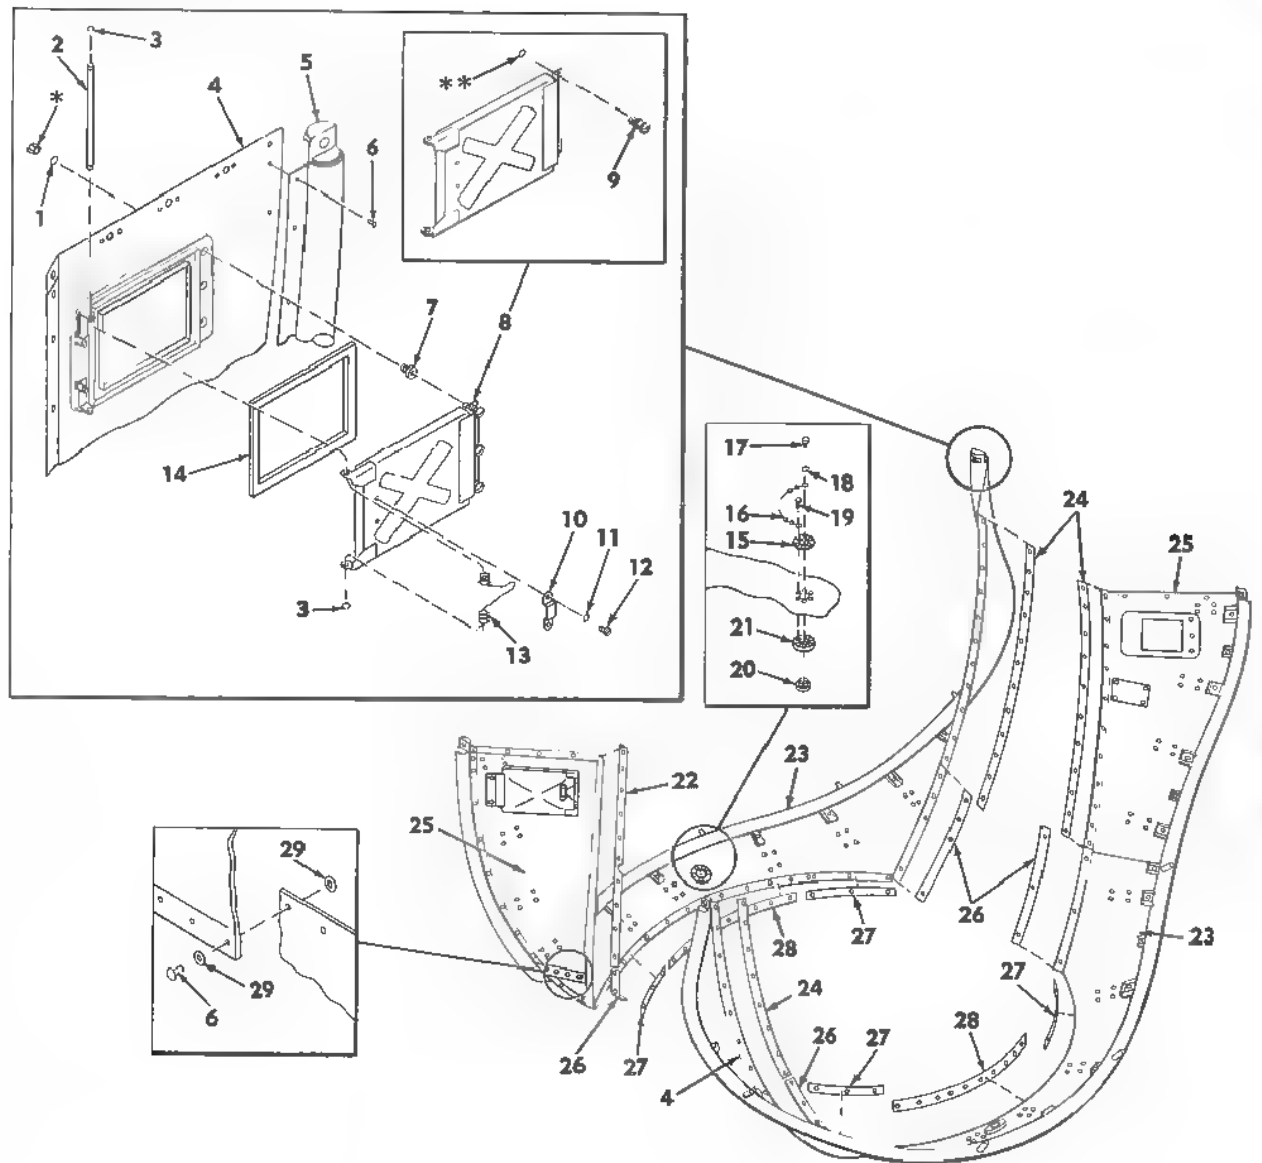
FRAME, RADOME /9005564/-PARTIAL EXPLODED VIEW
